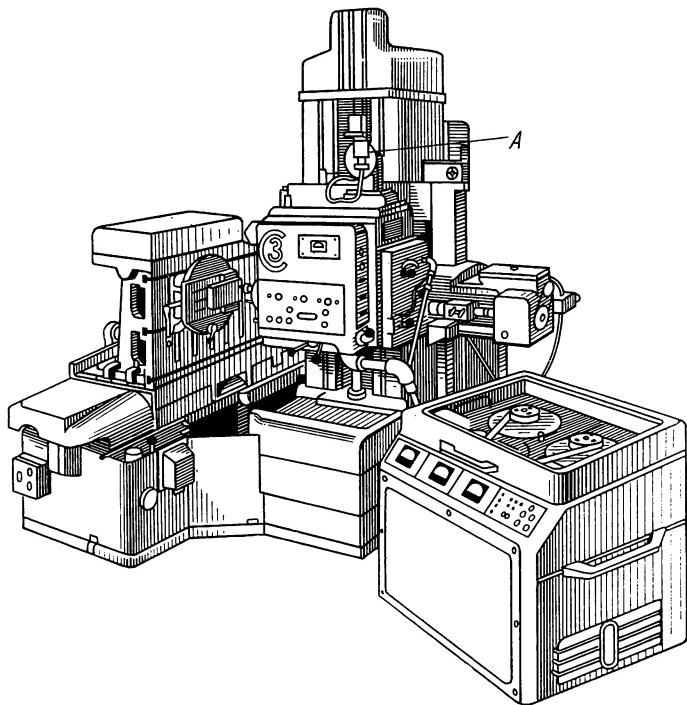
Three-dimensional N/C milling machine, model 6441ПР:
